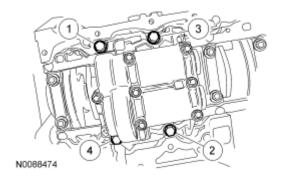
Identifying Balancer Unit Bolts Tightening Sequence
